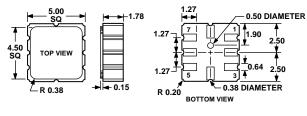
8-Terminal Ceramic Leadless Chip Carrier [LCC] (E-8) Dimensions shown in millimeters
